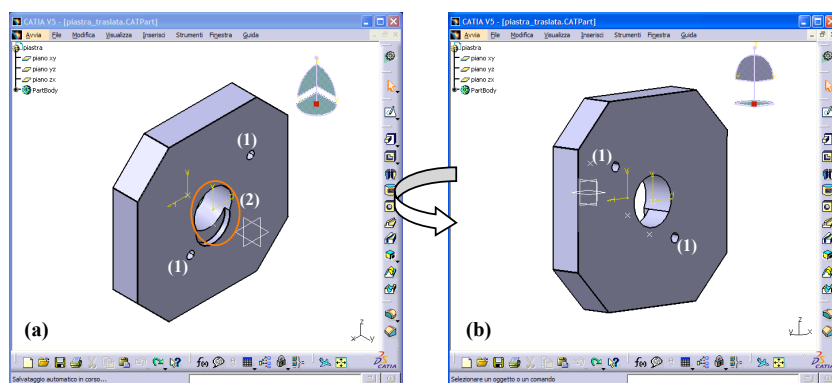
Plate geometry, (a) front and (b) rear view.
